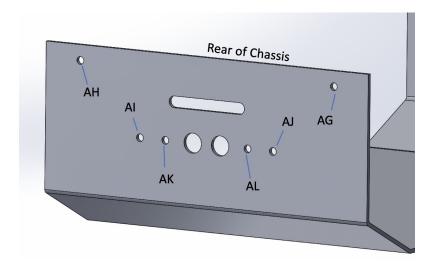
Chassis with basket mount and PDB mounting locations highlighted
